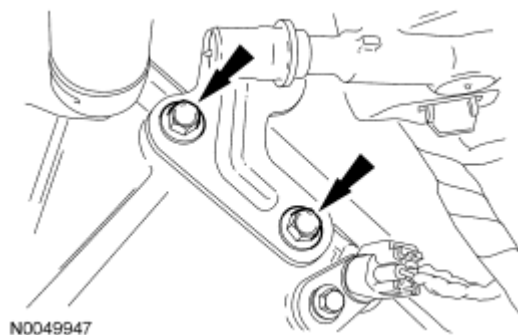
Locating Power Steering Reservoir Bracket Bolts
